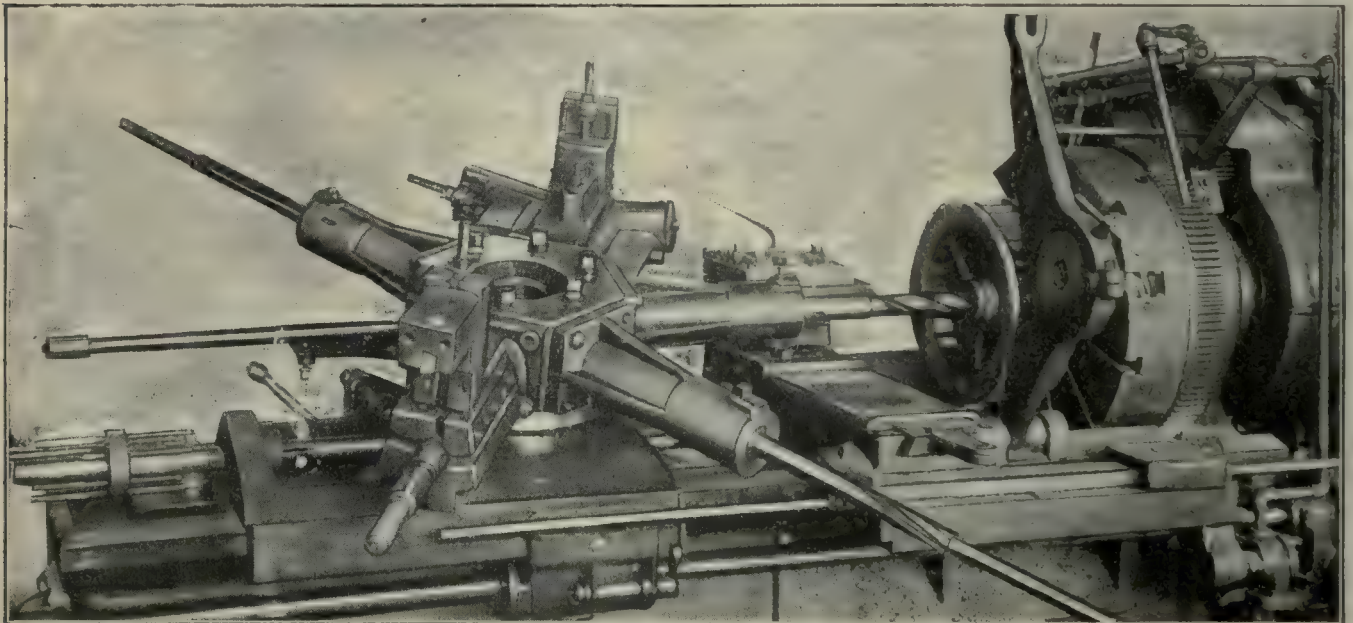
COMPLETE SET-UP FOR FINISHING SIDE AND BORE OF FLYWHEEL
